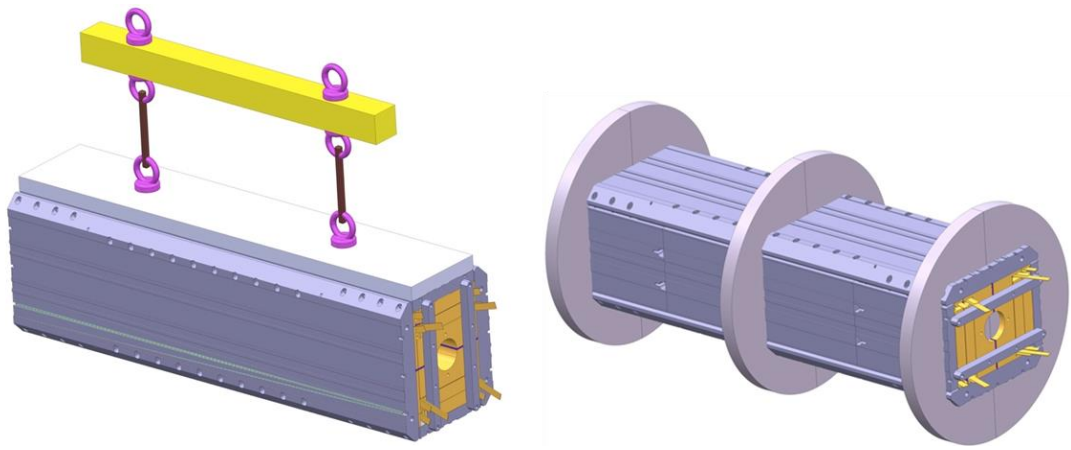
Coil-pack lifting and rotating tools.
